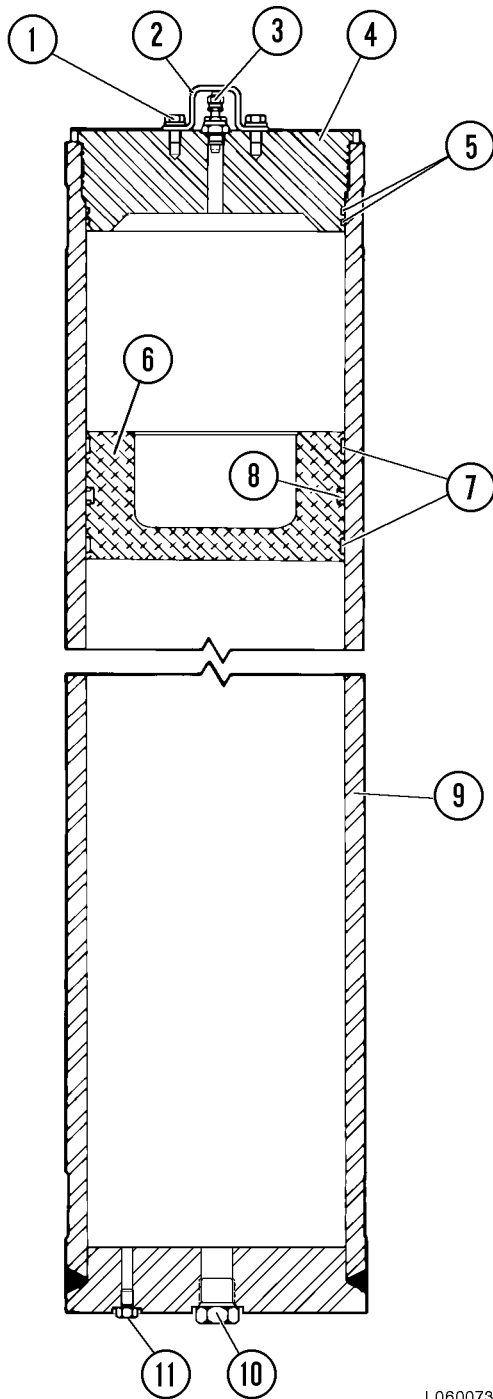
ACCUMULATOR ASSEMBLY
